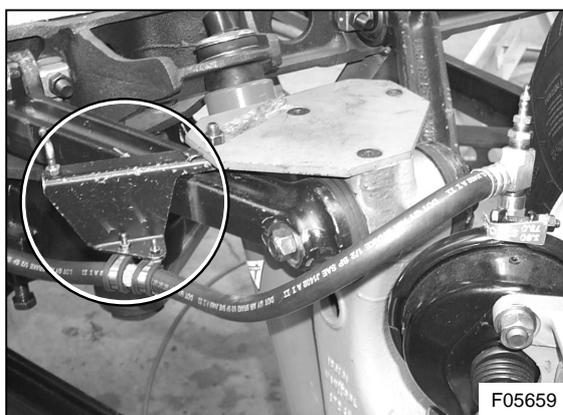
Left hand brake chamber tee connector in 1 o'clock position.
